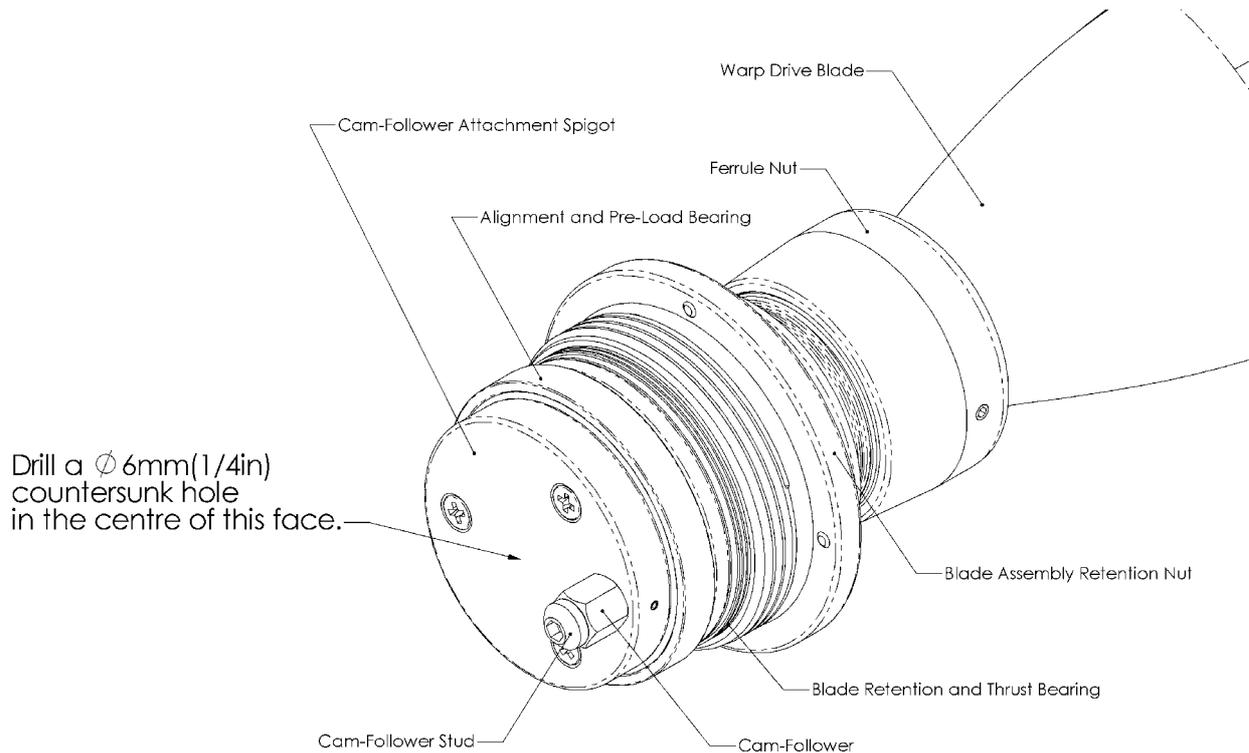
Blade Assembly showing Required Location of Countersunk Hole
